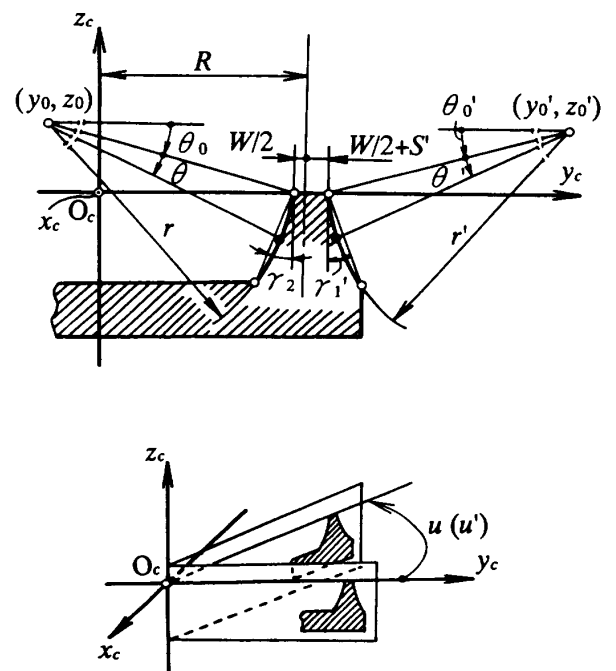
Shape of cutting edges of face-mill cutter in ring gear cutting
